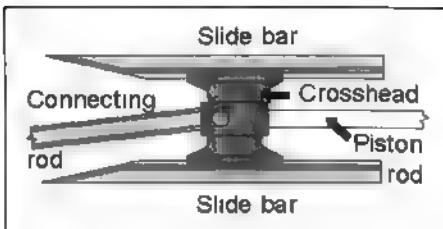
The crosshead provides two linear bearings operating between the slide bars.
